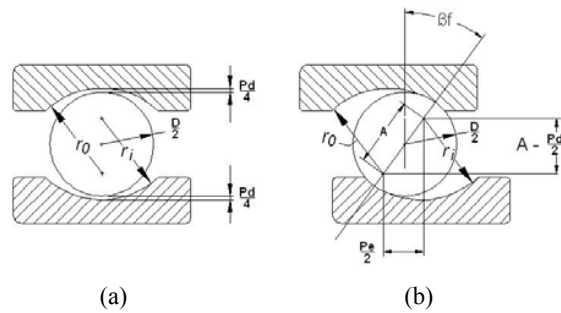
Cross section of a radial ball bearing showing ball-race contact due to axial shift of inner and outer rings. (a) Initial position. (b) Shifted position
